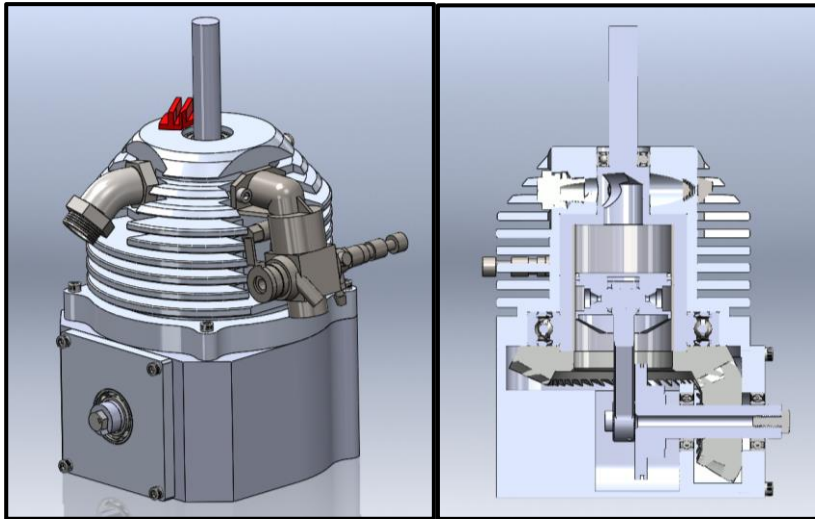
Full Engine Assembly (left) and Full Engine Cross-Section View (right)
